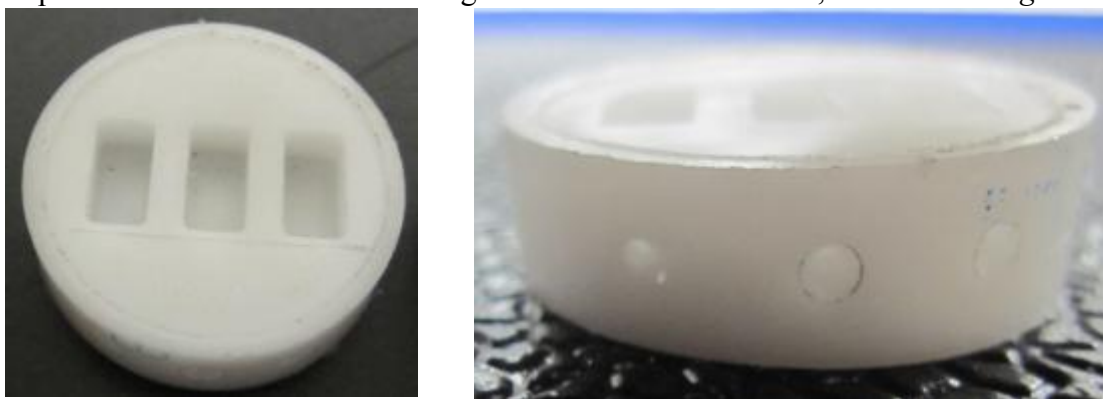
Finished electrode coupon, and side view of a finished electrode coupon with cable holes.
